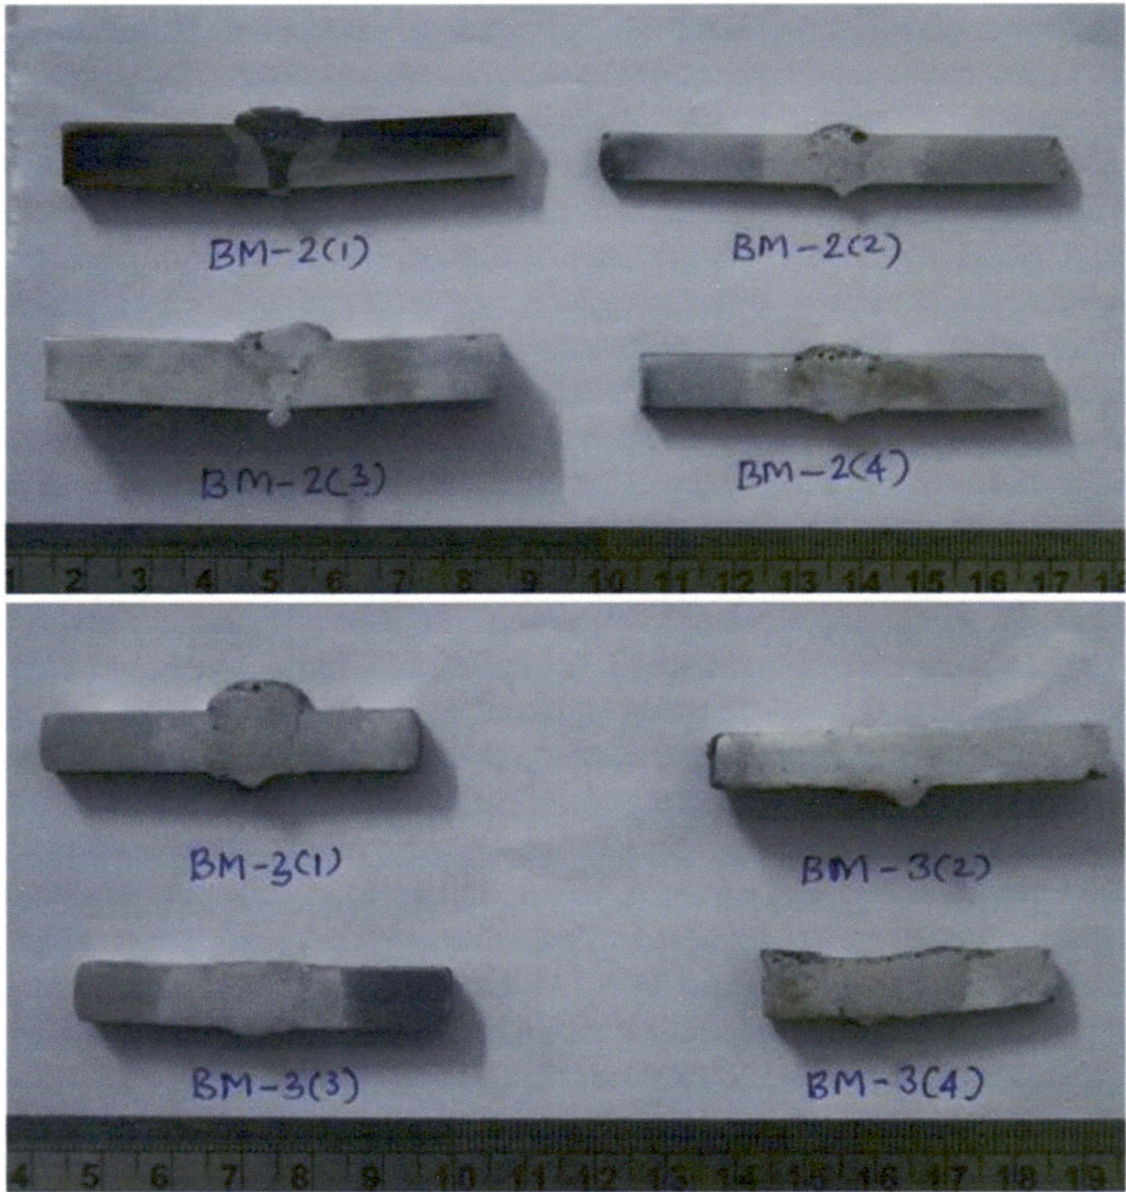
Weld Transverse sections of the GMA welded plates of BM-2 and BM-3 material at different welding parameters
